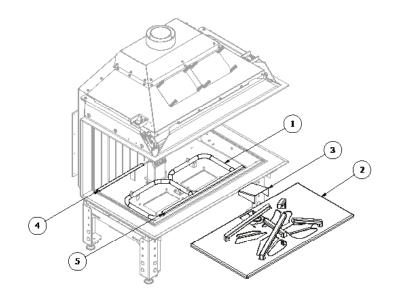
Main burner disassembly: 1 - lower part; 2 - upper part; 3 - control burner cover; 4 - rear bracket; 5 - front bracket
